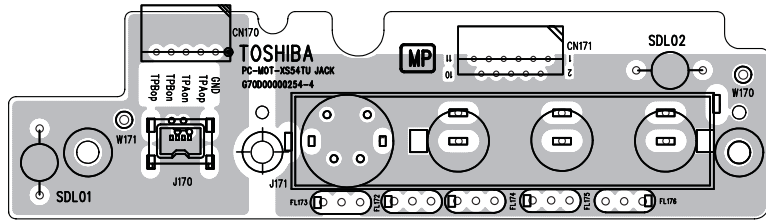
EU55 Front Jack PC Board (Top side)
